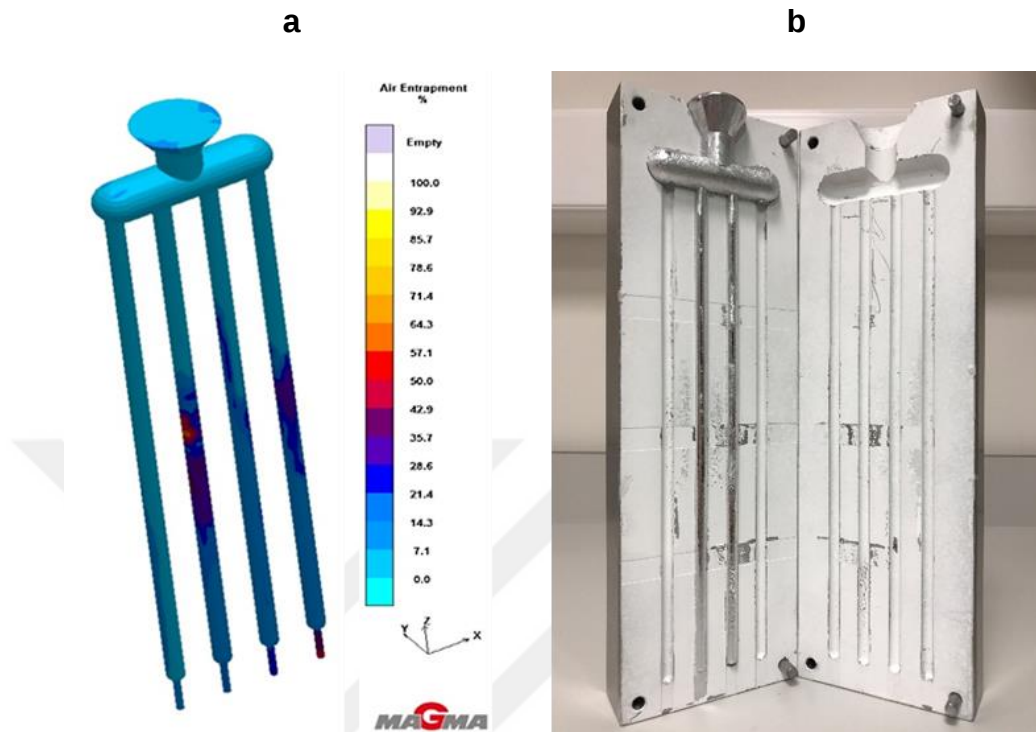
a) Air entrapment results from Magmasoft casting simulation program b) Stainless steel mold for manufacturing of rods with 5 mm in diameter.
